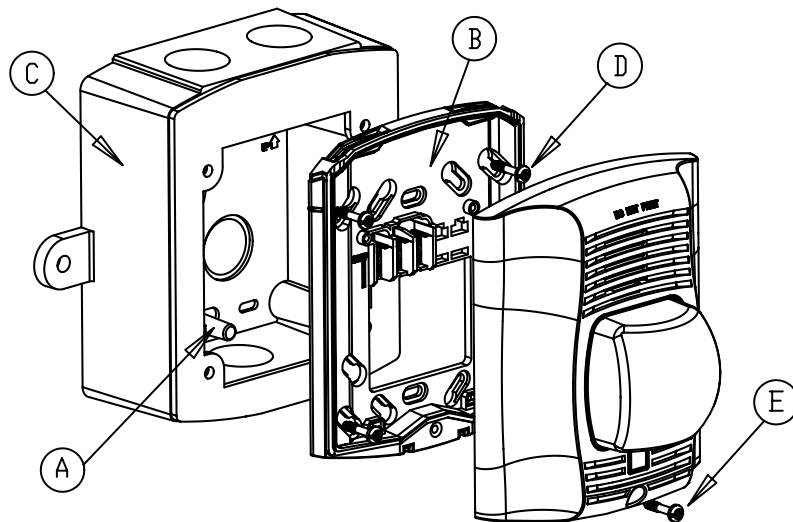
Mounting Outdoor Horns, Strobes, and Horn Strobes to a Weatherproof Back Box
